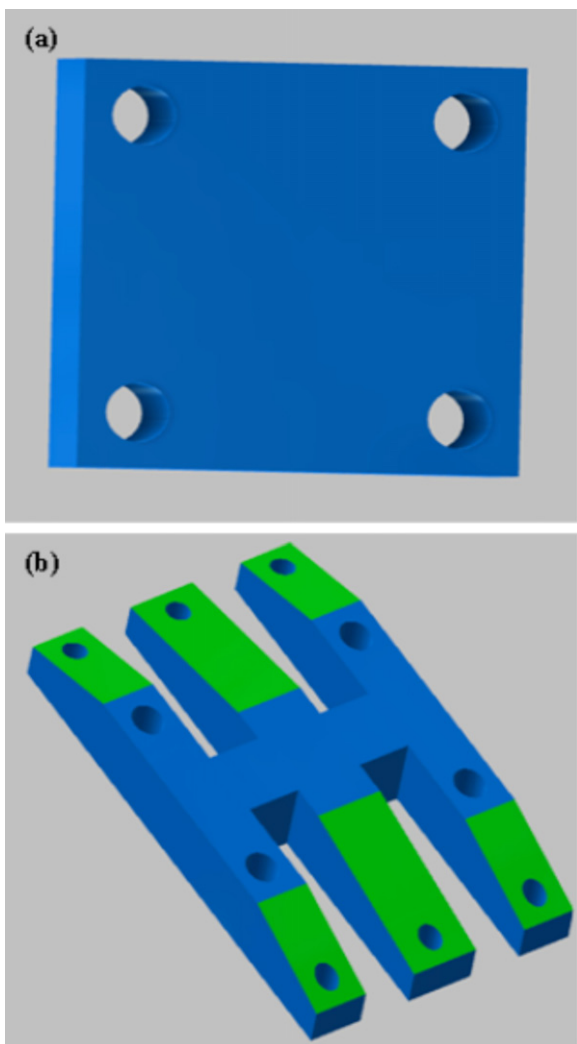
Three-dimensional view of end-plates of (a) design-1 and (b) design-2.
